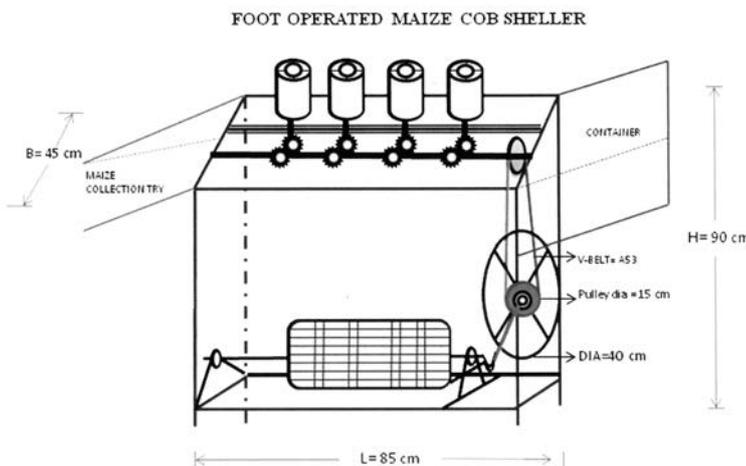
Isometric view of maize sheller used in shelling unit of designed prototype
